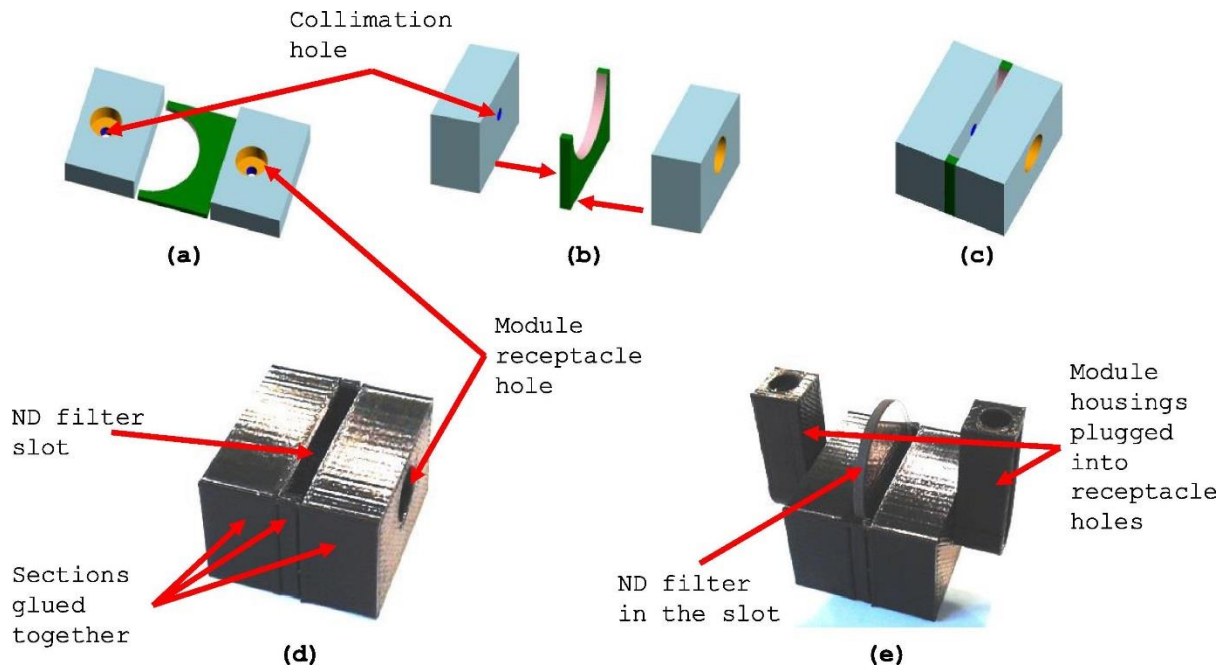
The optical calibrator. a) CAD model optimised for printing of individual sections on a plastic filament extruding 3D printer. b) CAD model showing the assembly of the separate parts for gluing together. c) CAD model of the assembled unit. d) Photograph of the glued-together optical calibrator unit, showing slot for ND filter insertion and the hole for the LED or sensor module. e) The optical calibrator with two modules plugged in (notionally one LED module and one sensor module), and a 25mm ND filter located in the slot.
